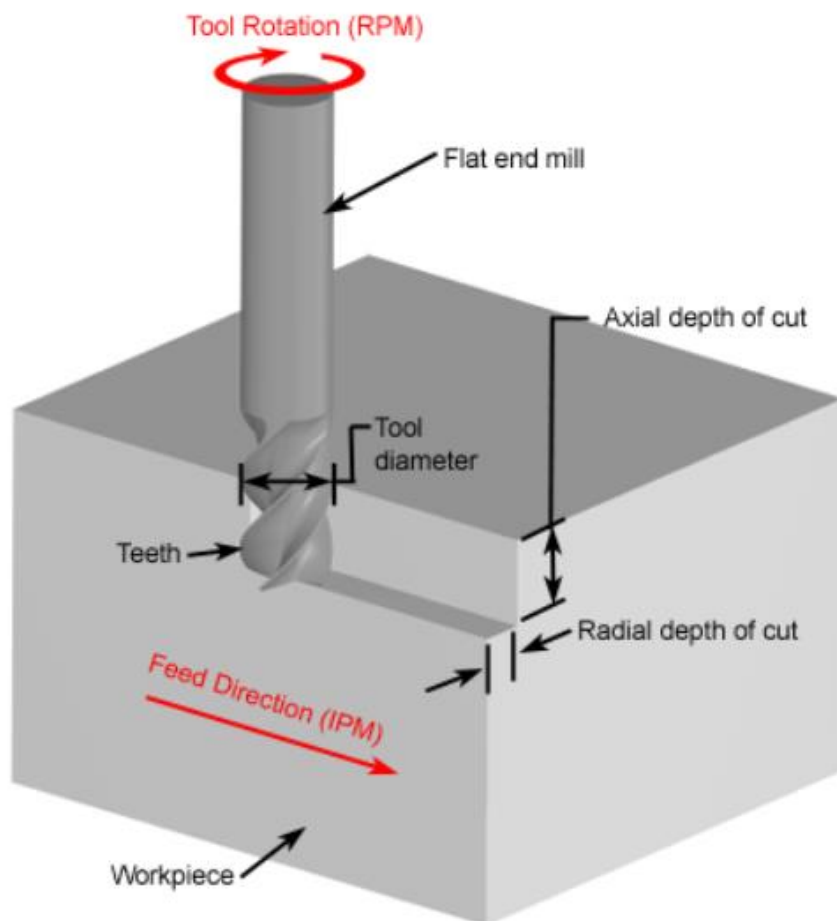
Illustration showing feed per tooth and tool advancement during a milling operation.
